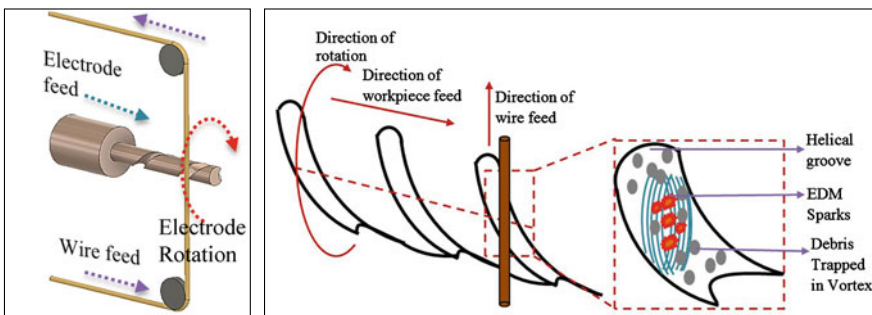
Representation of the mechanism of machining helical grooves by WEDT
